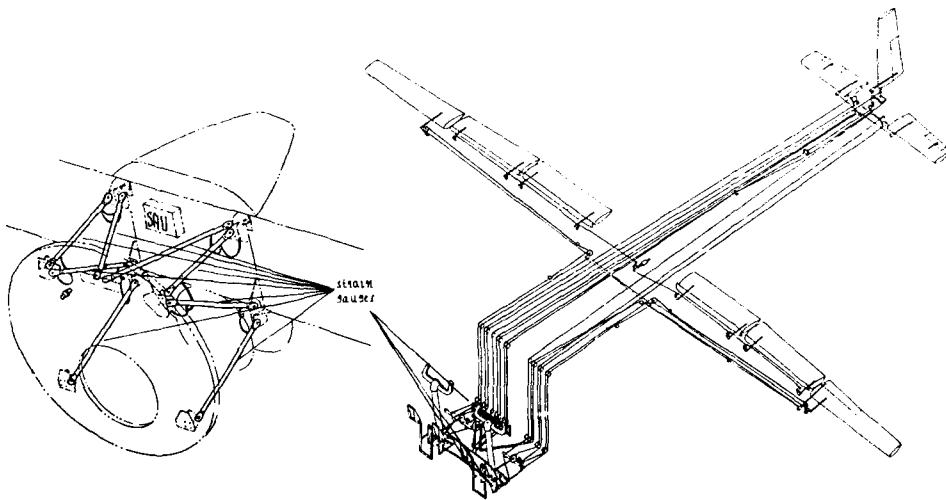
detail of strain gauges in the 8-bar engine mountings
